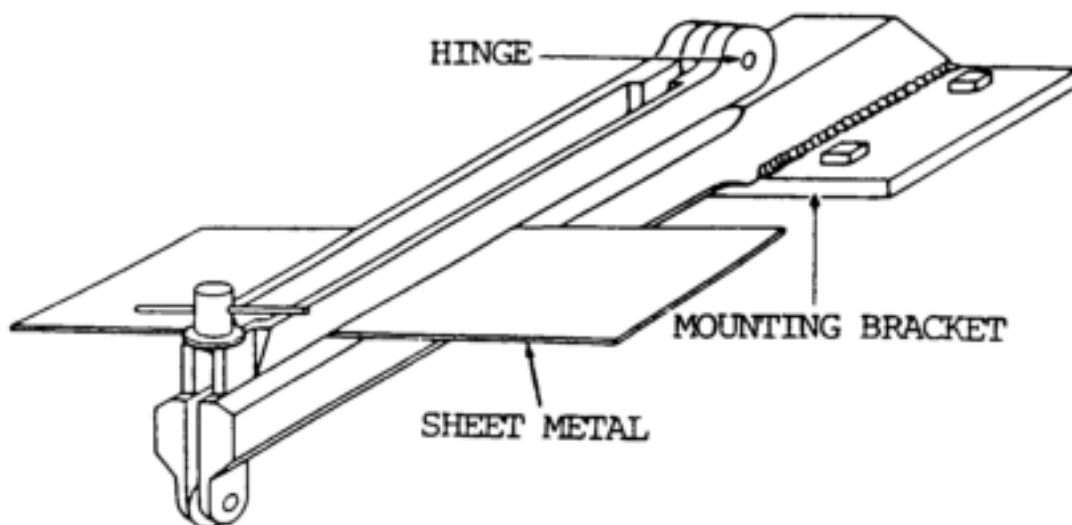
Fixture used in the welding of sheet metal.
